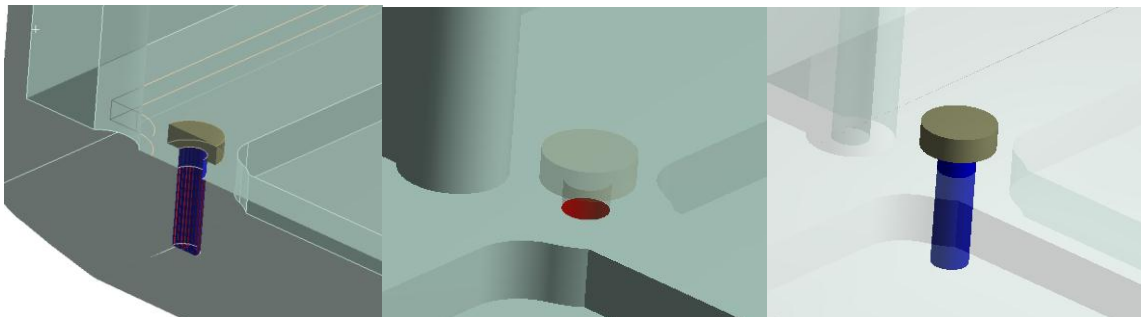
Bonded contact between screw and front panel. The screw shown is used to hold the MMI board in place (can be seen in the far left image)
